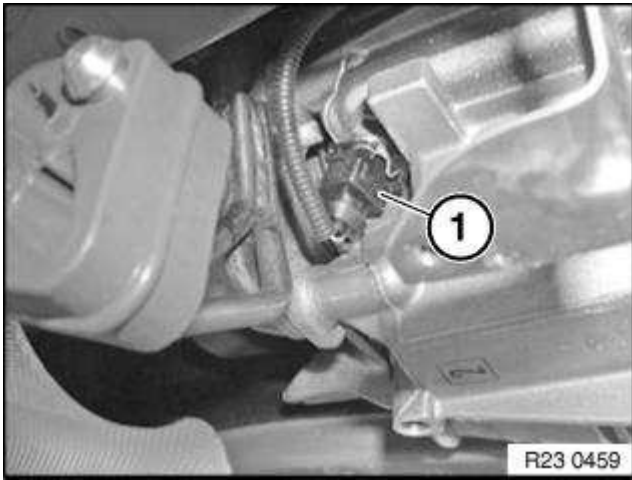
Disconnect Plug Connection (1) On Reverse Gear Switch (GS6-53DG/BG Transmission)
